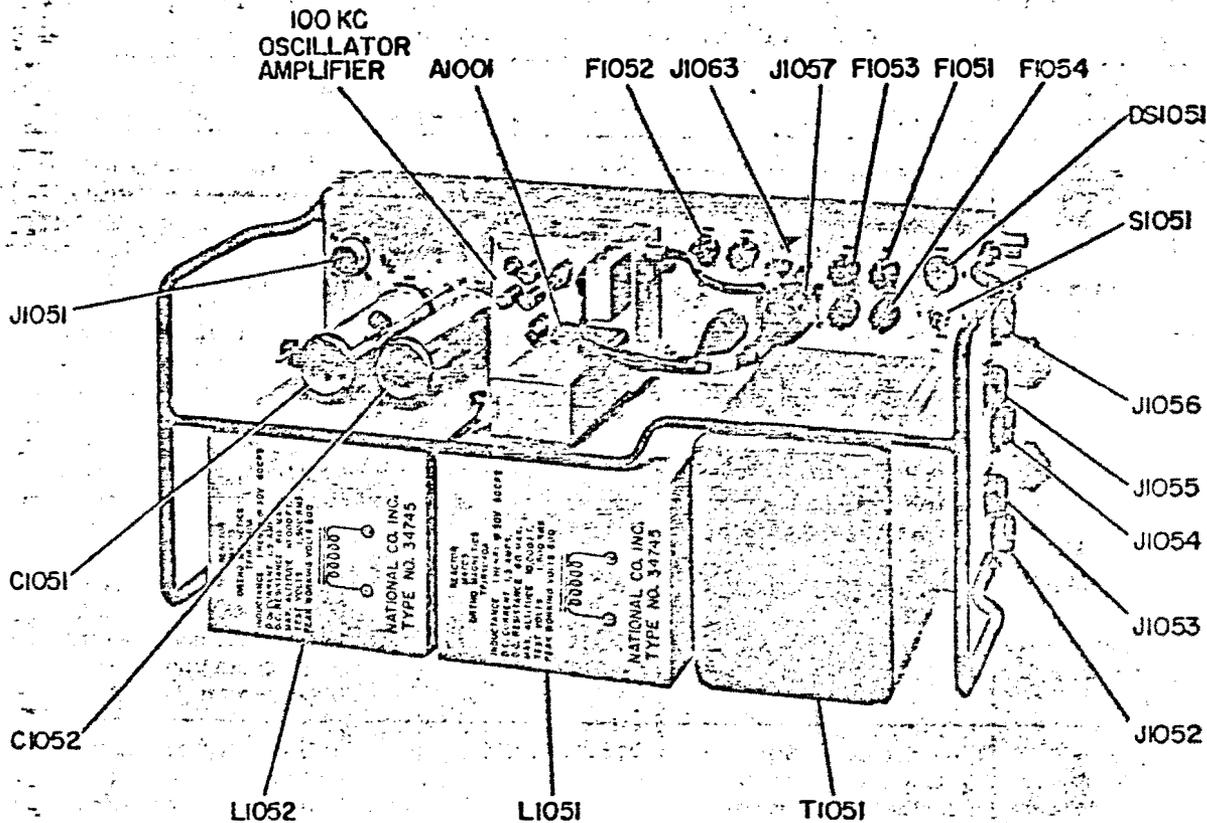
Oscillator-Power Supply O-928/FLR, Top View, Location of Parts
